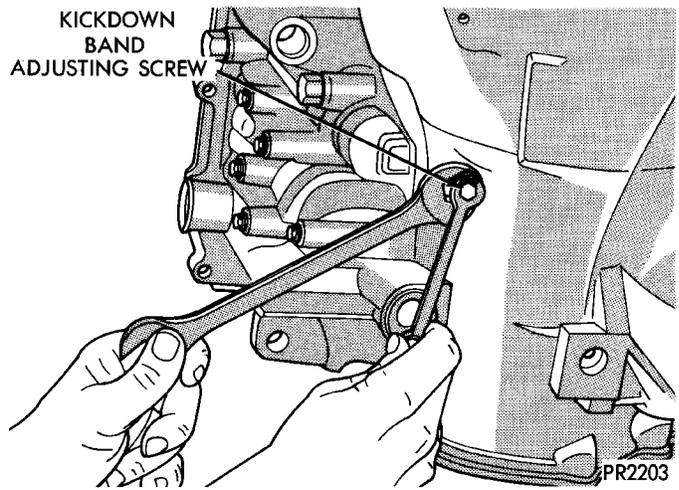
Loosen Lock Nut and Tighten Kickdown Band Adjusting Screw
